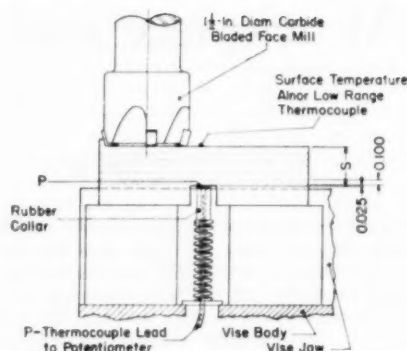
TEST ARRANGEMENT FOR MEASUREMENT OF WORKPIECE TEMPERATURES
